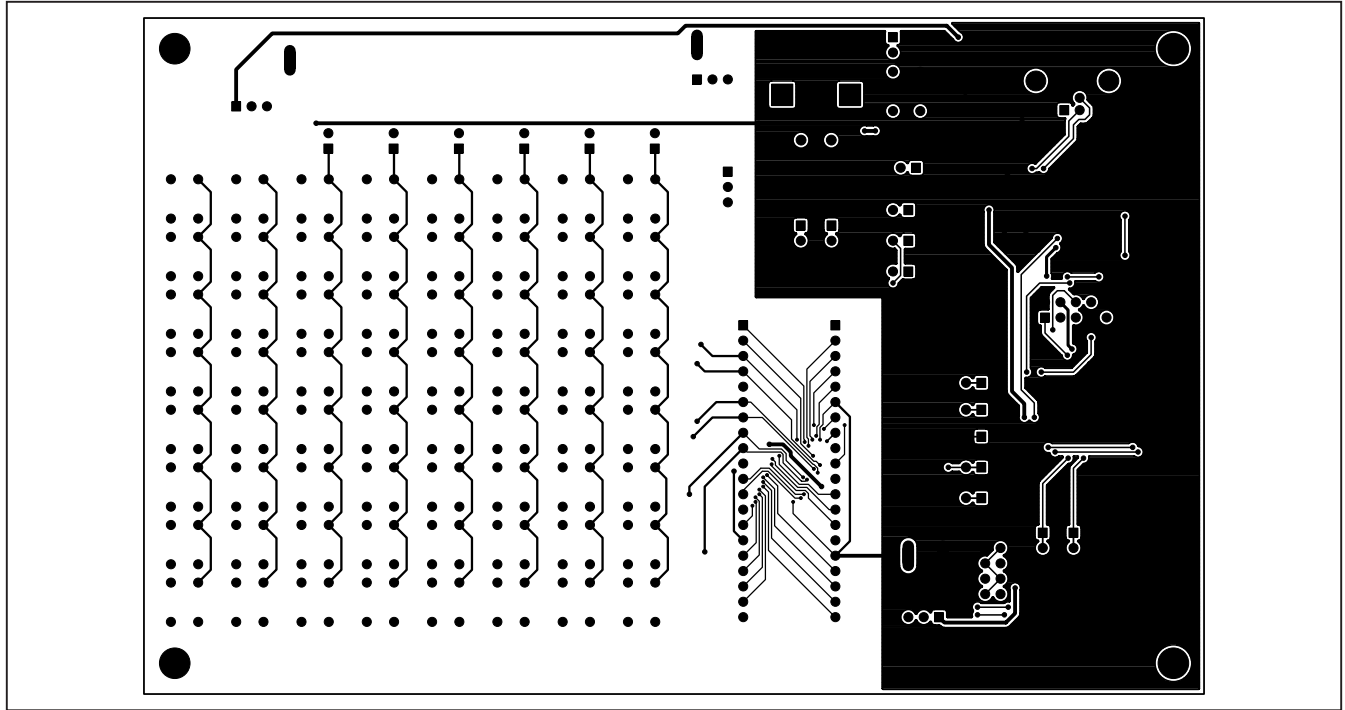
MAX7360 EV Kit PCB Layout—Solder Side
